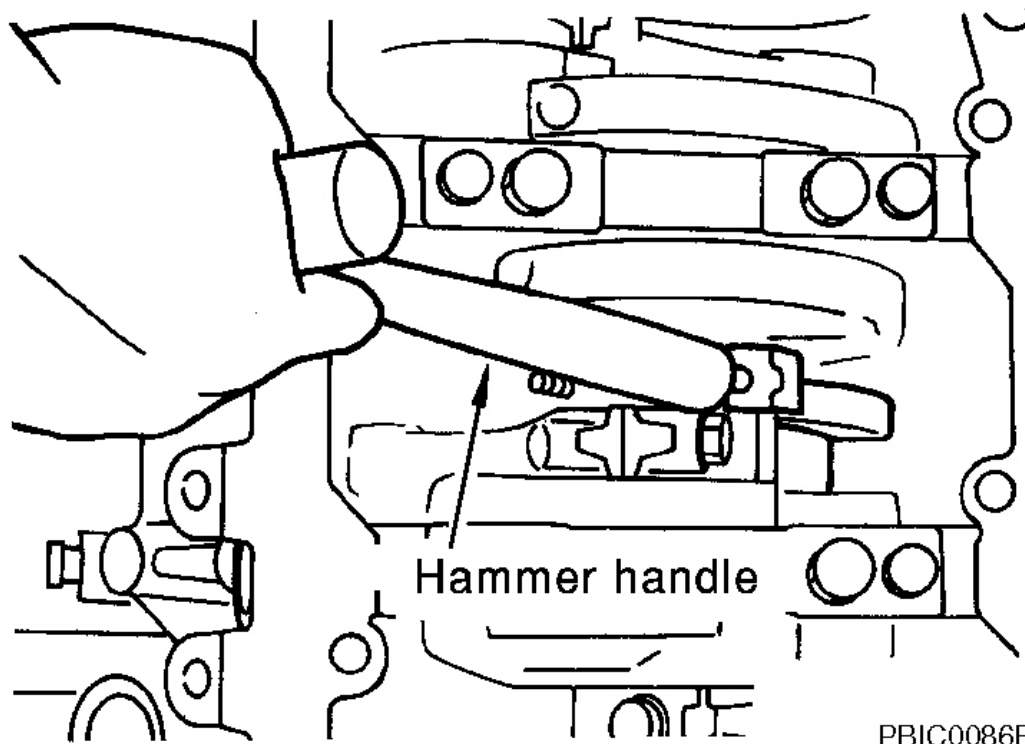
Pushing Piston And Connecting Rod Assembly Out To Cylinder Head Side
